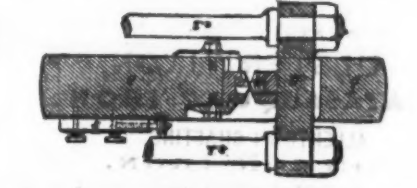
Sectional View, Showing the Side Knife Edges.
